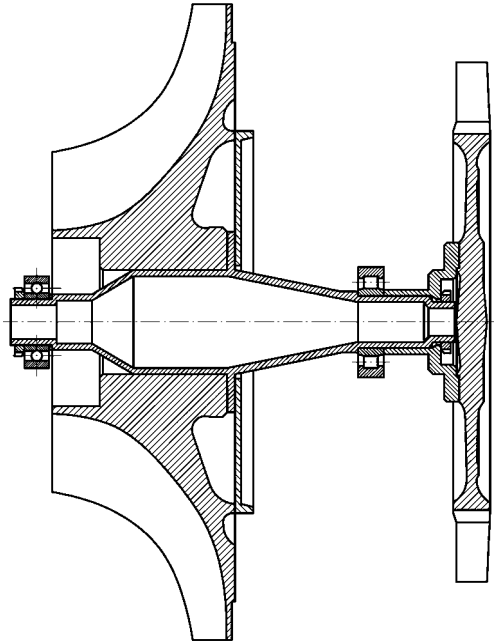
Simplified drawing of the rotor of a turbojet engine.
